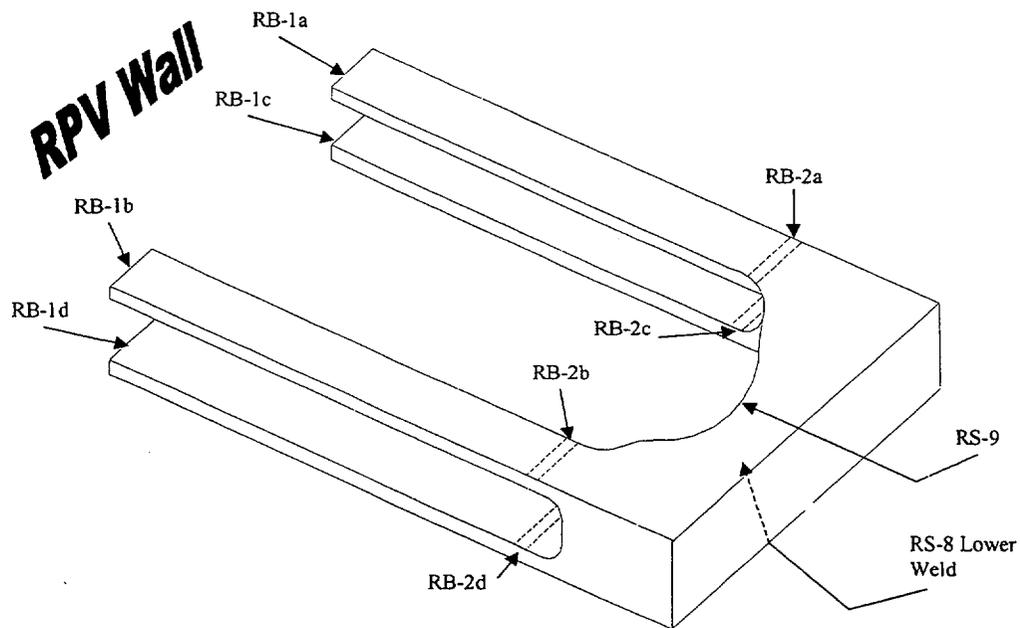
Jet Pump Riser to Yoke Weld Designations
